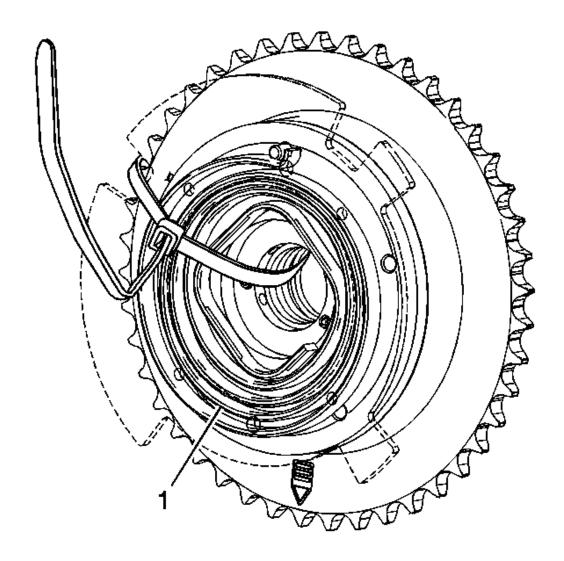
Inspecting CMP Actuator For Broken Spring Courtesy of GENERAL MOTORS CORP.
